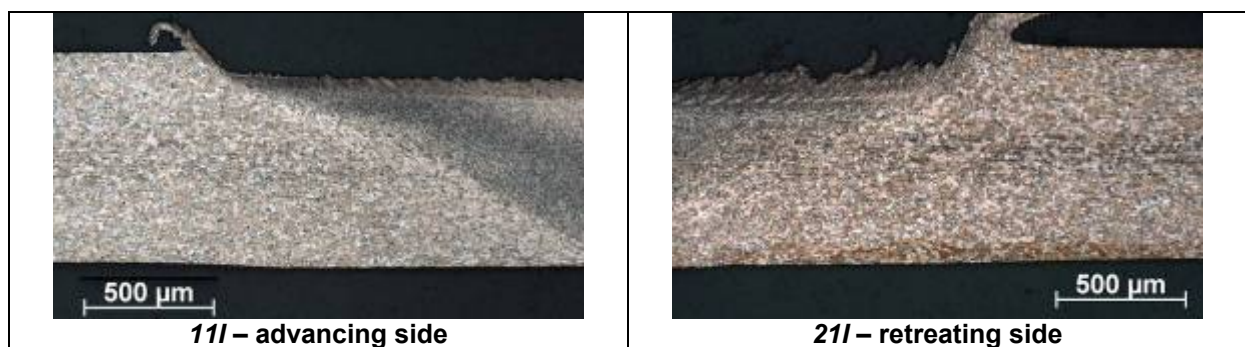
Main underfill locations in welds realised with "tool1" (11I) and "tool2" (21I).
